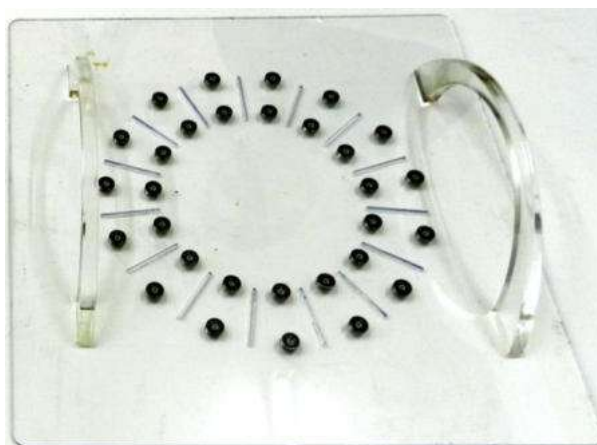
Designed and manufactured prototype of a pad with bearings for positioning ball bearings
